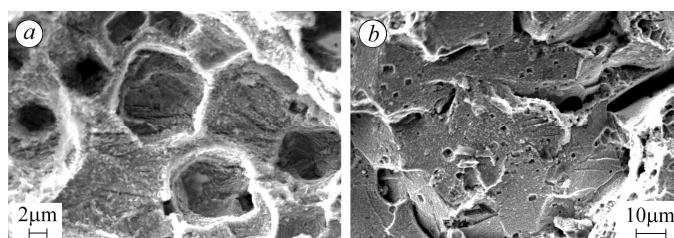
Fractographic peculiarities caused by pipe hydrotesting at the stage of subcritical (a) and over critical (b) fracture.
